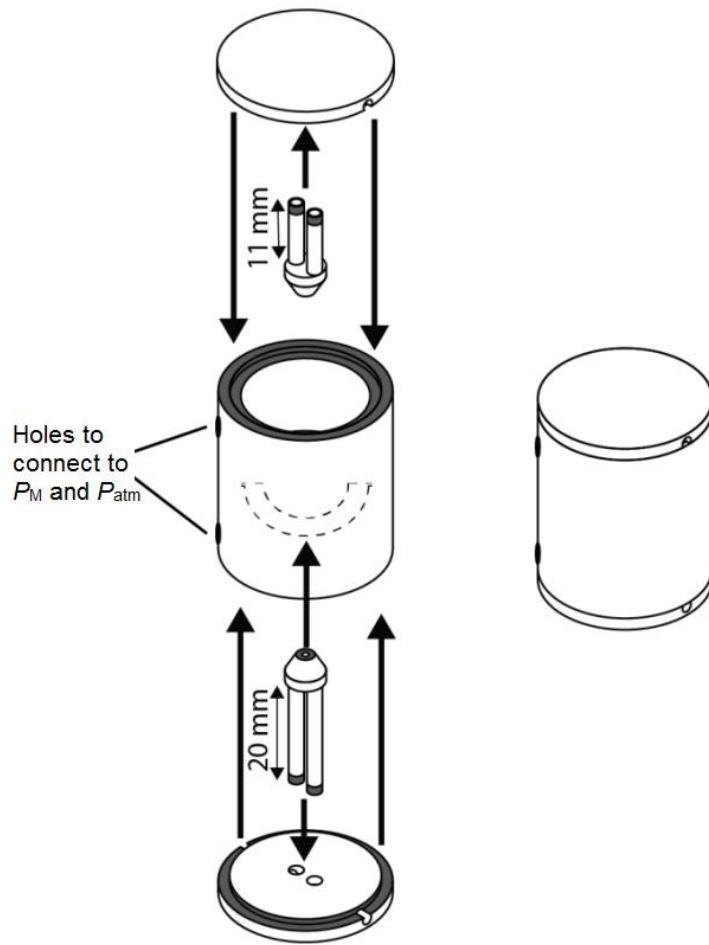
Assembly of the valve. The gray areas mark locations where adhesive was applied and the elastomeric sections were bonded.
